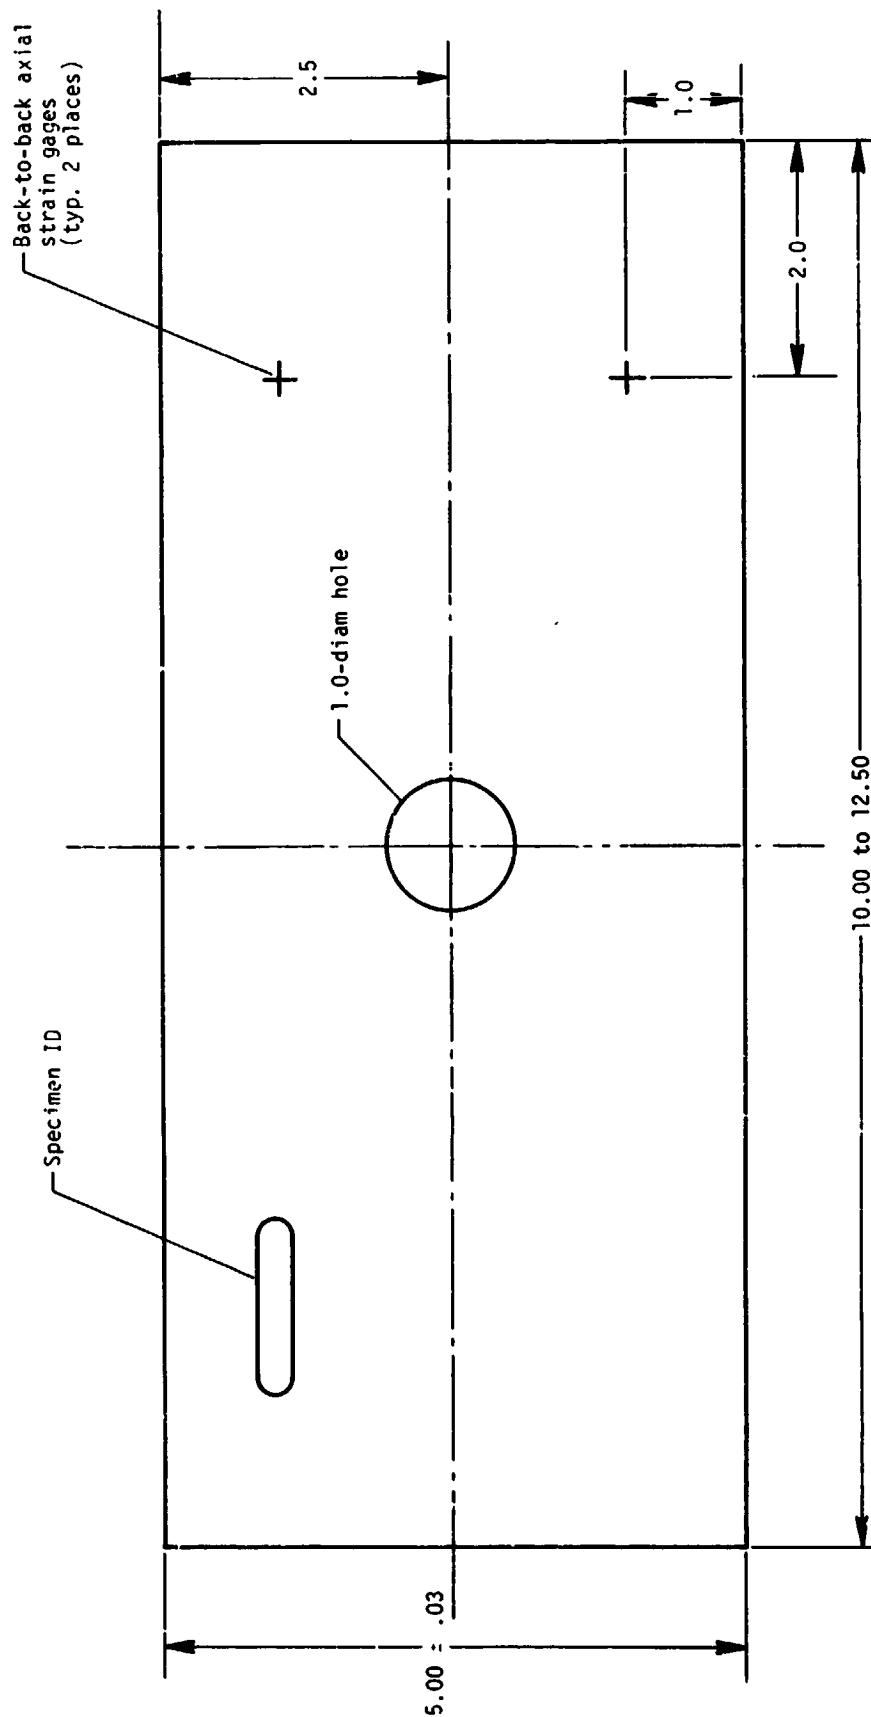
Inplane open-hole compression test specimen. Dimensions are in inches.
